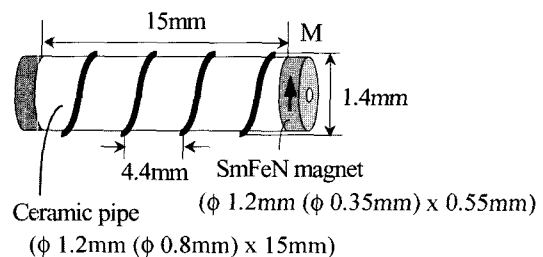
Basic structure of the spiral-type magnetic micromachine.
